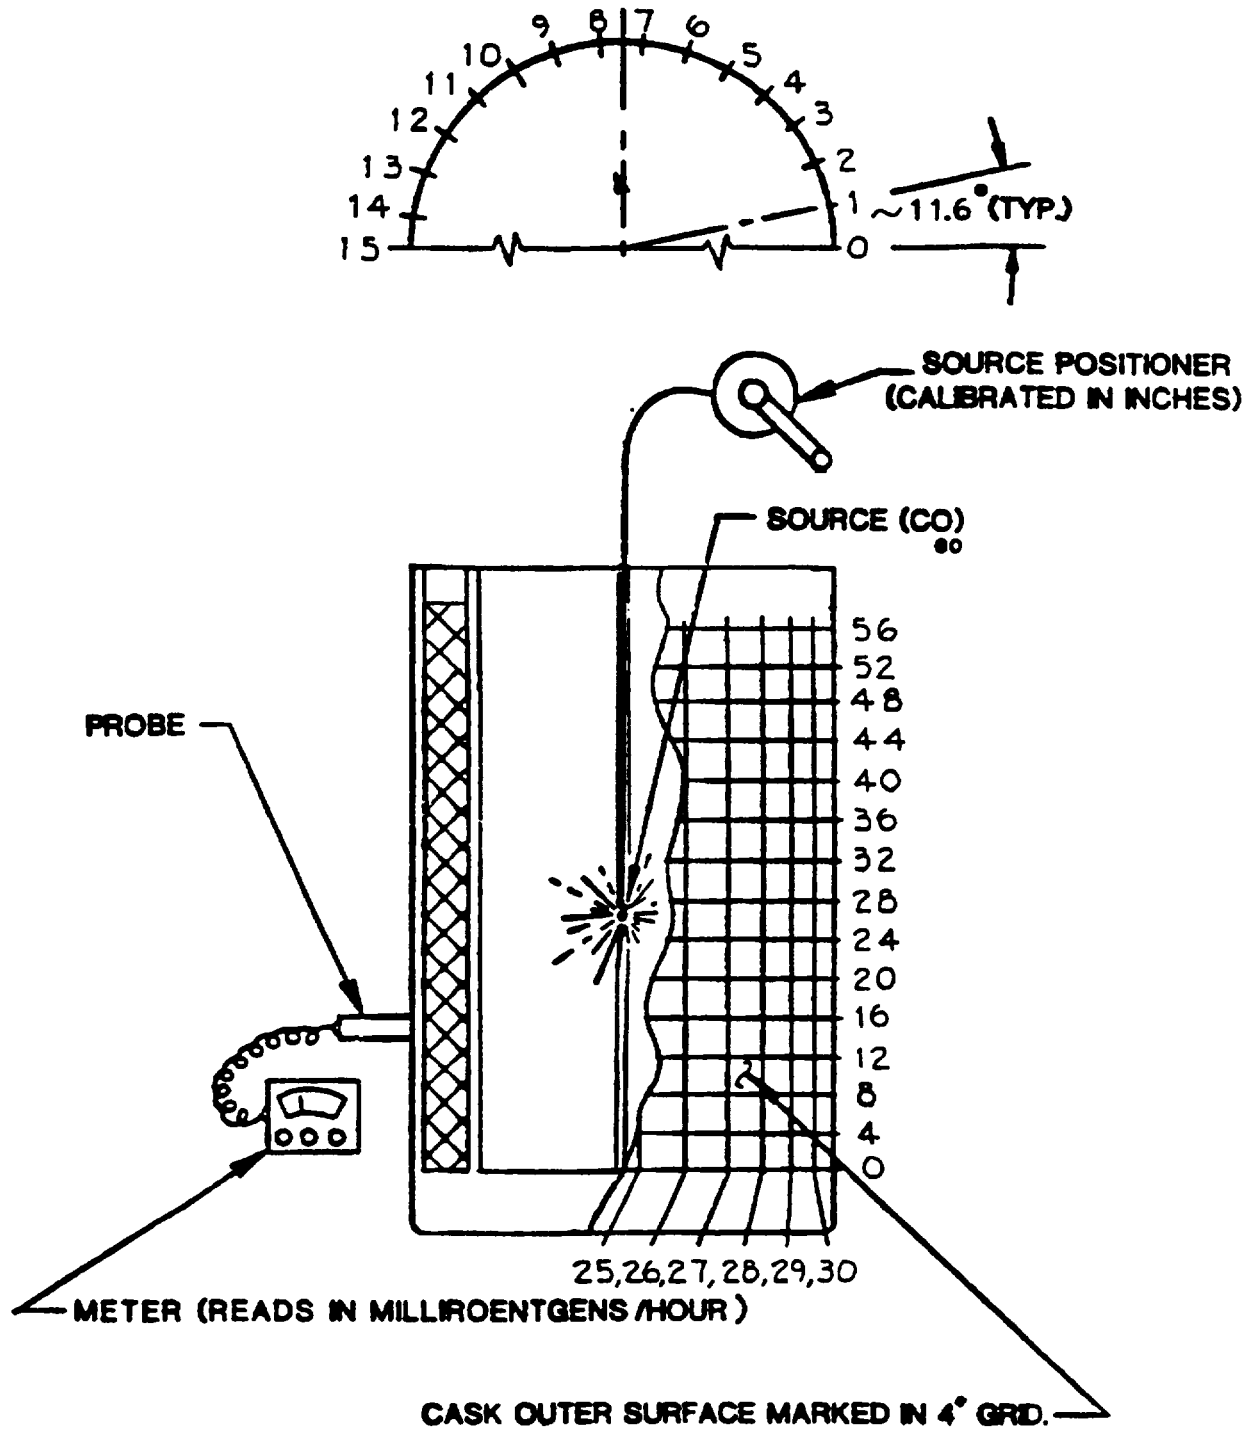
CASK SHIELDING INSPECTION POINTS
